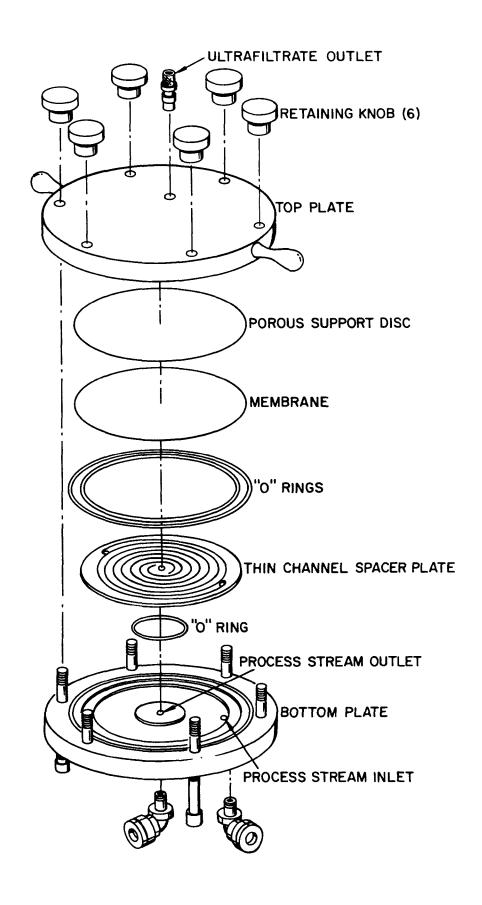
EXPLODED VIEW OF AMICON TC-1 CELL
